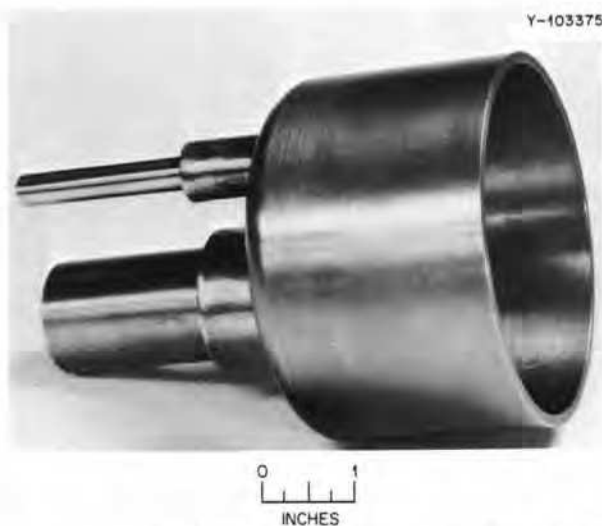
View of back-extruded molybdenum vessel after machining.
